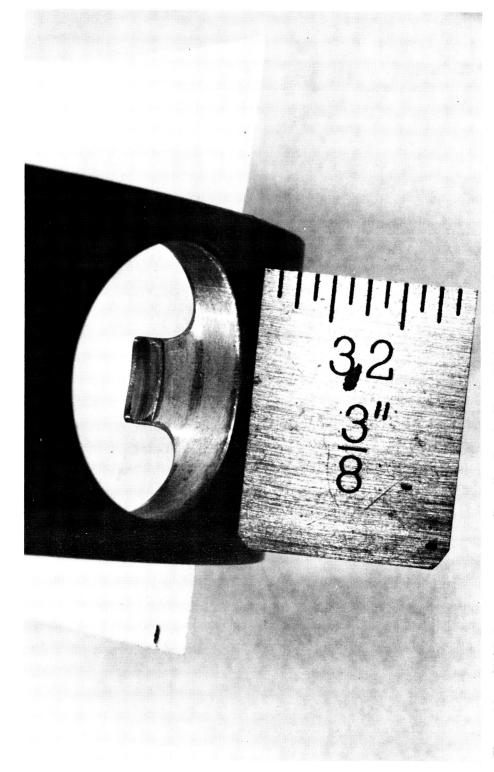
SNAP-8 mercury pump after vibration testing. Motor end bearing separator pocket showing ball contact pattern.
